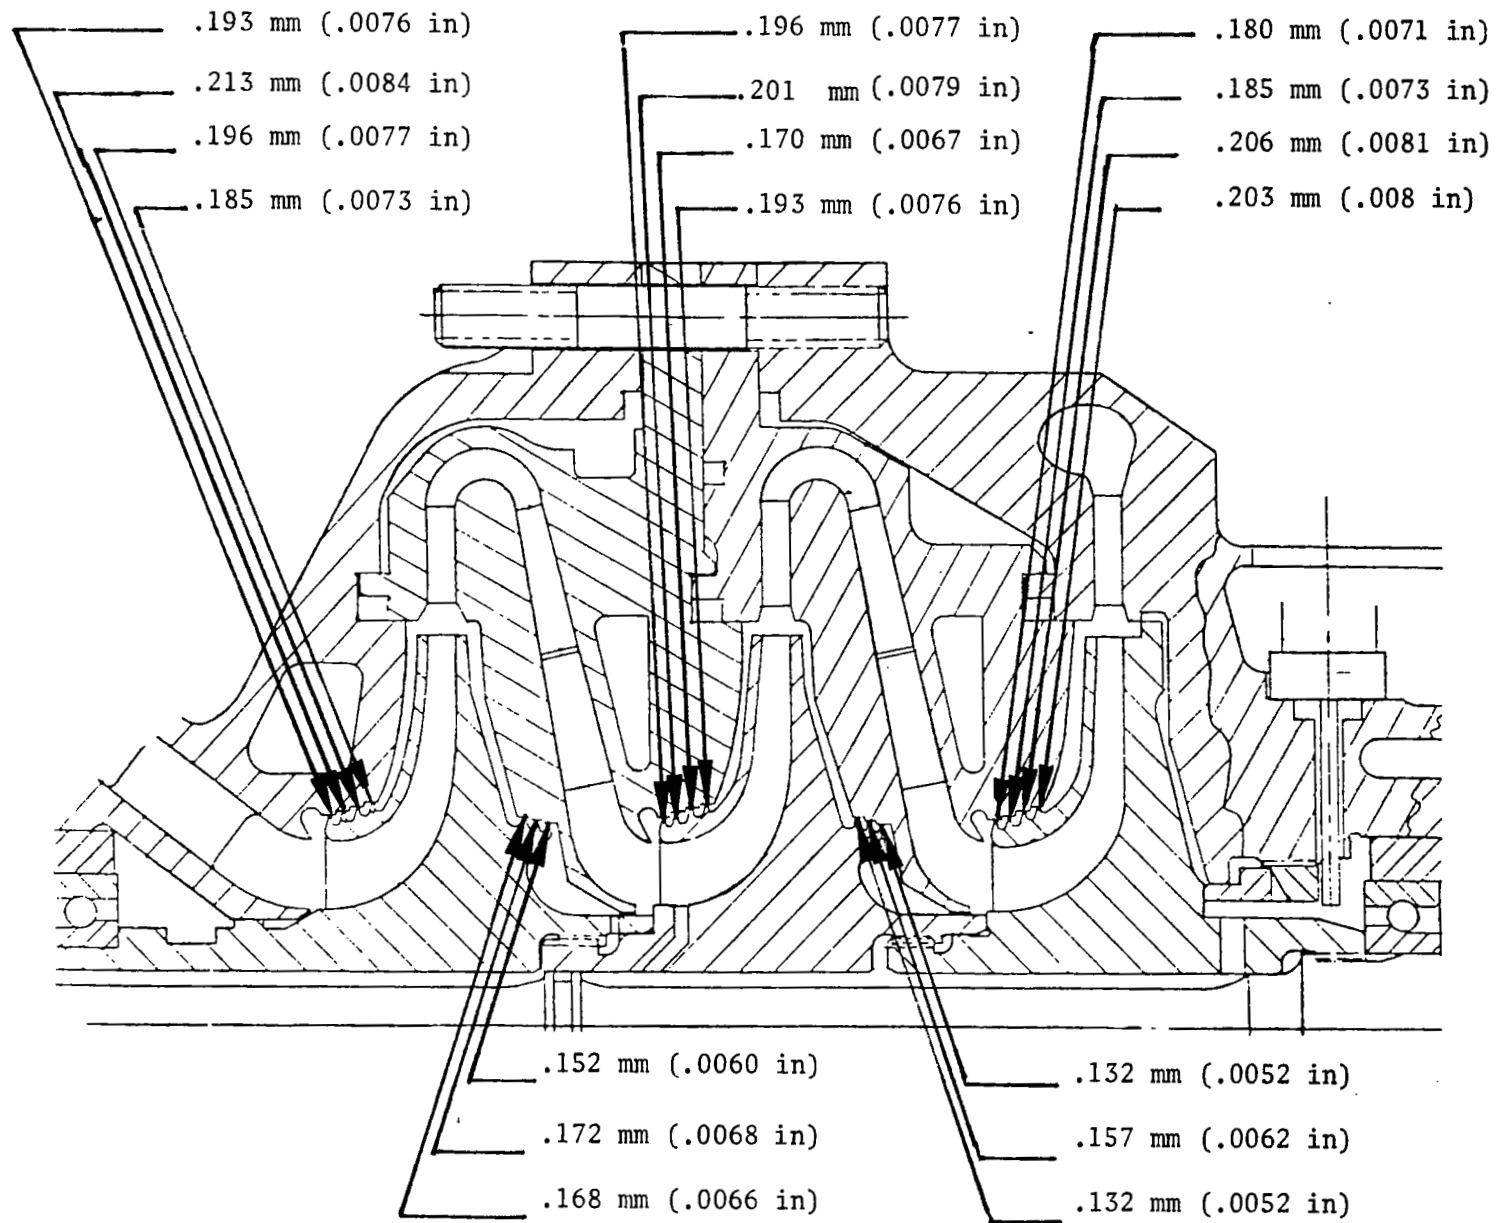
Mark 48-F S/N 01-0 Assembly Impeller Labyrinth Clearances
